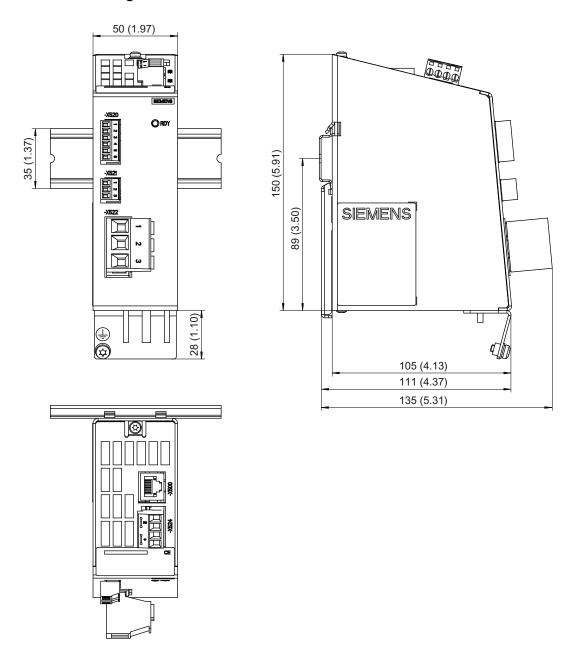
Dimension drawing of the Voltage Sensing Module VSM10, all data in mm and (inches)
